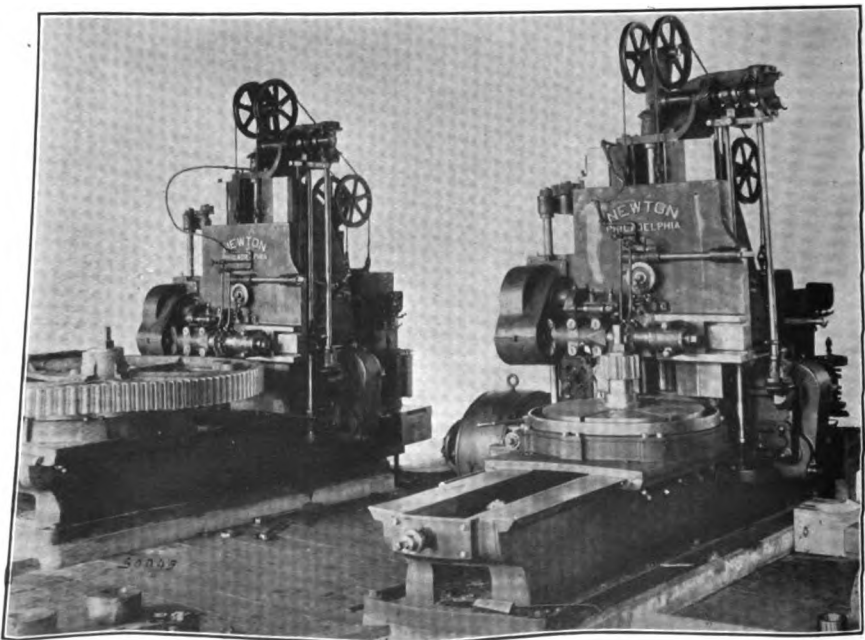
NEW RAPID-PRODUCTION SPUR-GEAR CUTTING MACHINE. NEWTON MACHINE TOOL WORKS.
